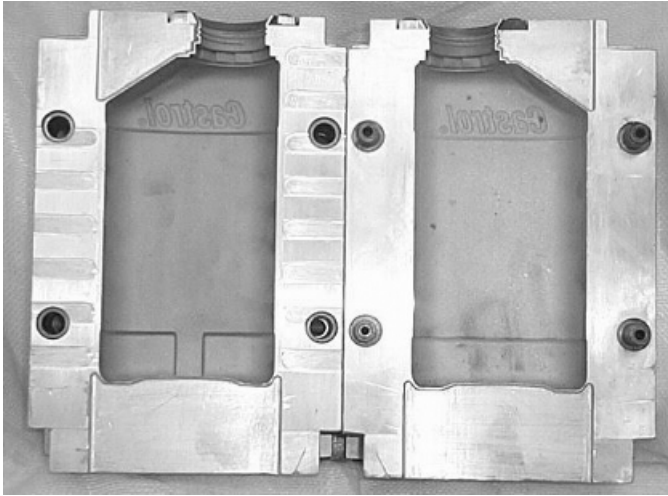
Quart-size bottle mold cavities for Castrol motor oil.
